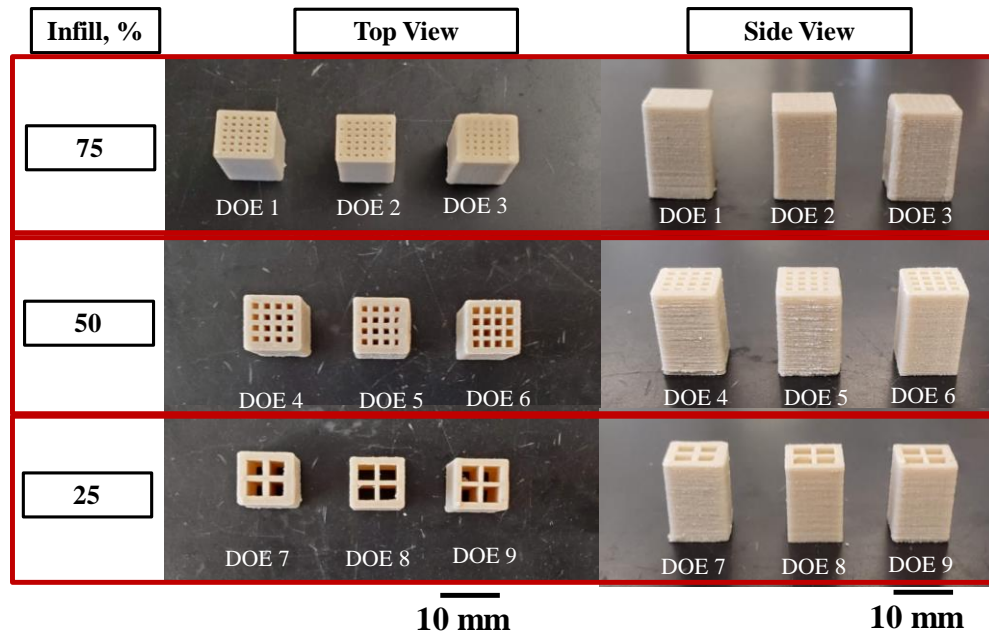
Representative CF³ 3D printed HAp parts printed using different print parameters.
